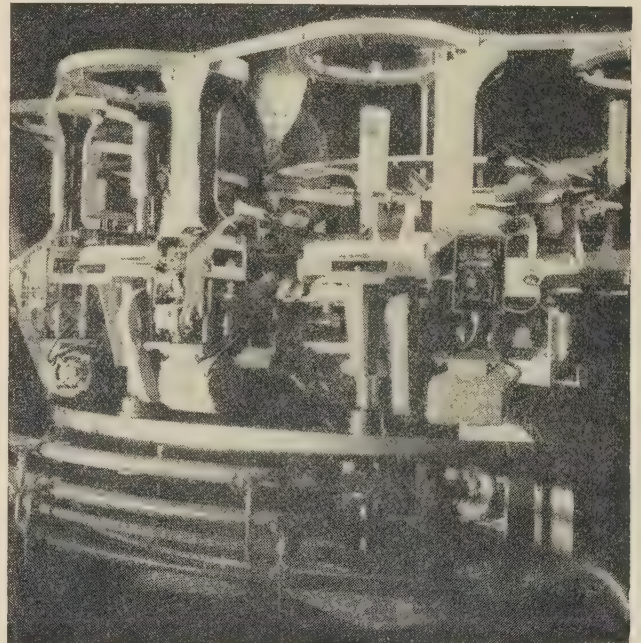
Constructing a 12-head cathode-ray-tube sealing machine.
